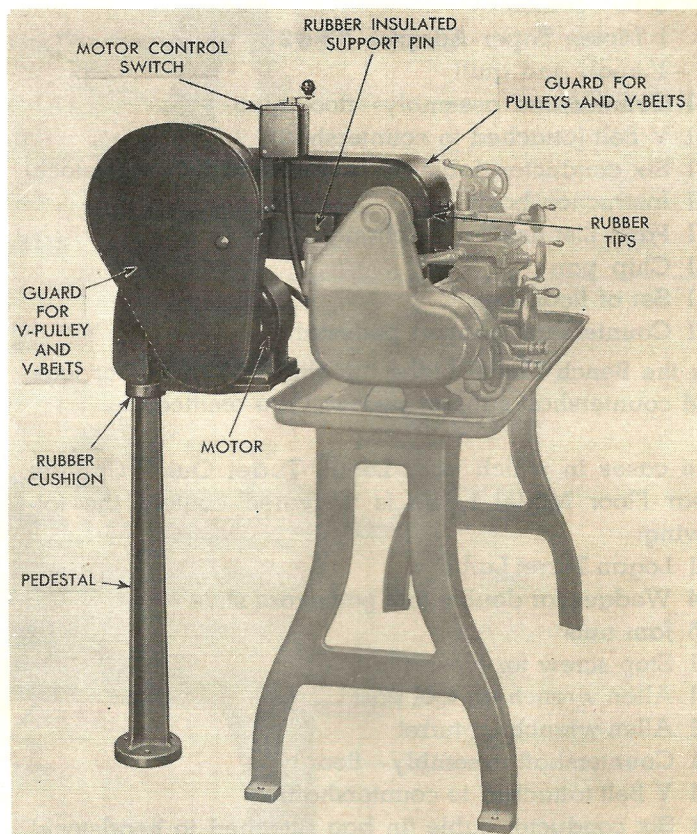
END VIEW OF COUNTERSHAFT ASSEMBLY
